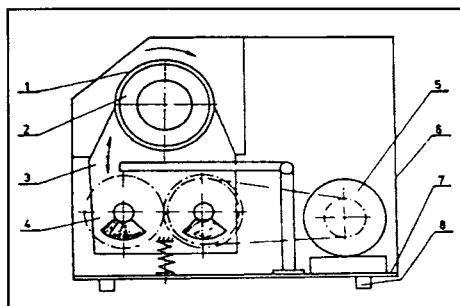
Scheme of LAMOW-C-5x2 RVM: 1-chamber unit, 2-chamber, 3-vibrator, 4-vibrating unit frame, 5-mill drive, 6-shield, 7-base plate, 8-vibro-insulator
